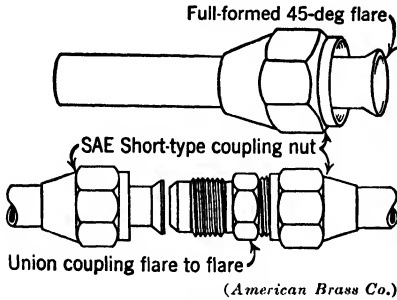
A full-formed copper-tube flare and the completed joint ready for assembly.
